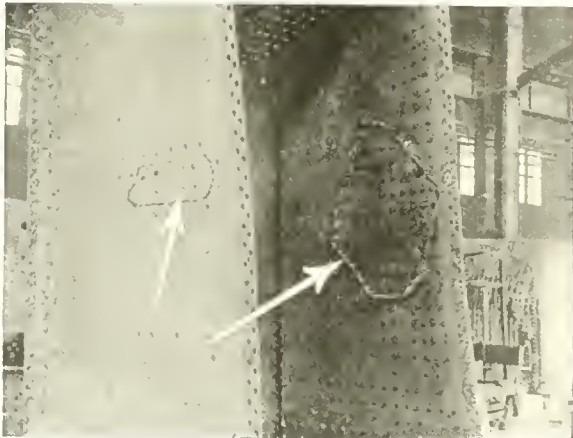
Welded Side Sheets in locomotive fire box showing two patches made with the arc welder. Ordinarily this weld would have been made without disassembling, but the fire box was taken out for other repairs.
